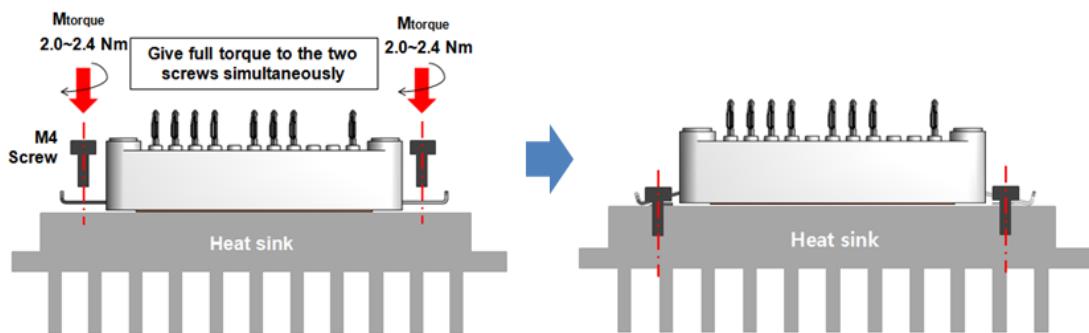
Illustration of Screw Clamping with Heatsink (Method 1)
